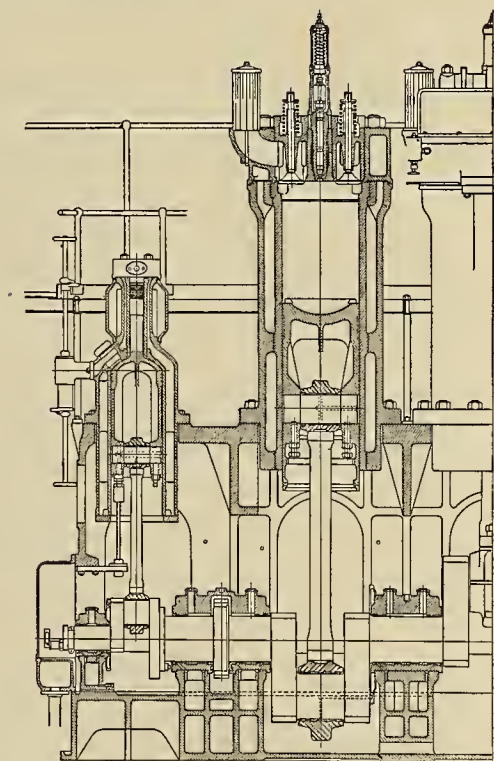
Section of McIntosh & Seymour Oil Engine.
